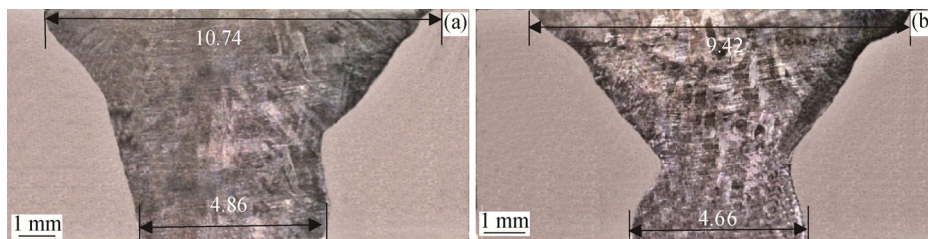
Macrographic images of weldments fabricated with ERNiCr-3 filler wire: (a) GTAW; (b) PCGTAW.
